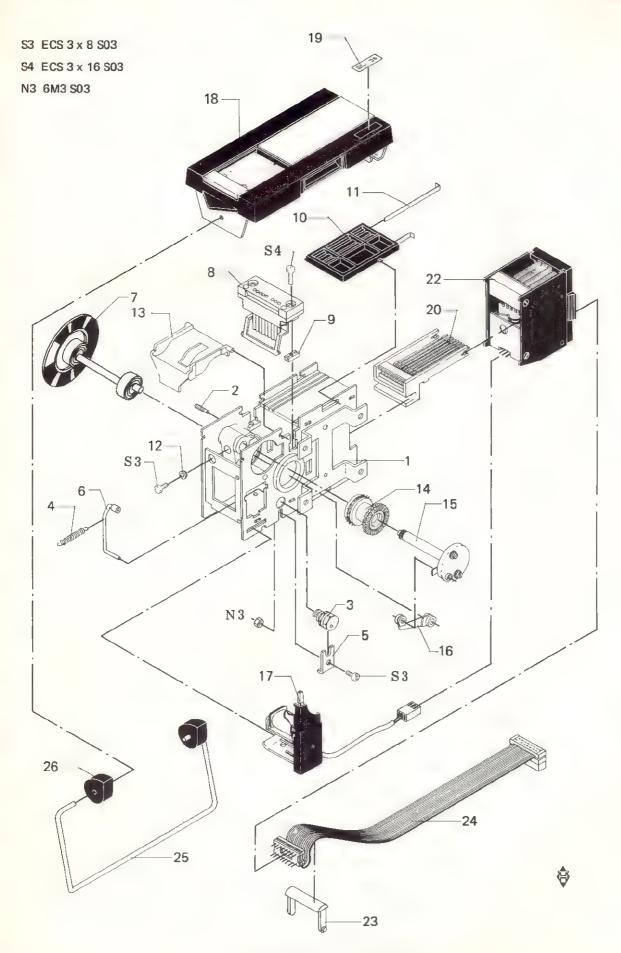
GNT 36 Punch Mechanism, Exploded View
